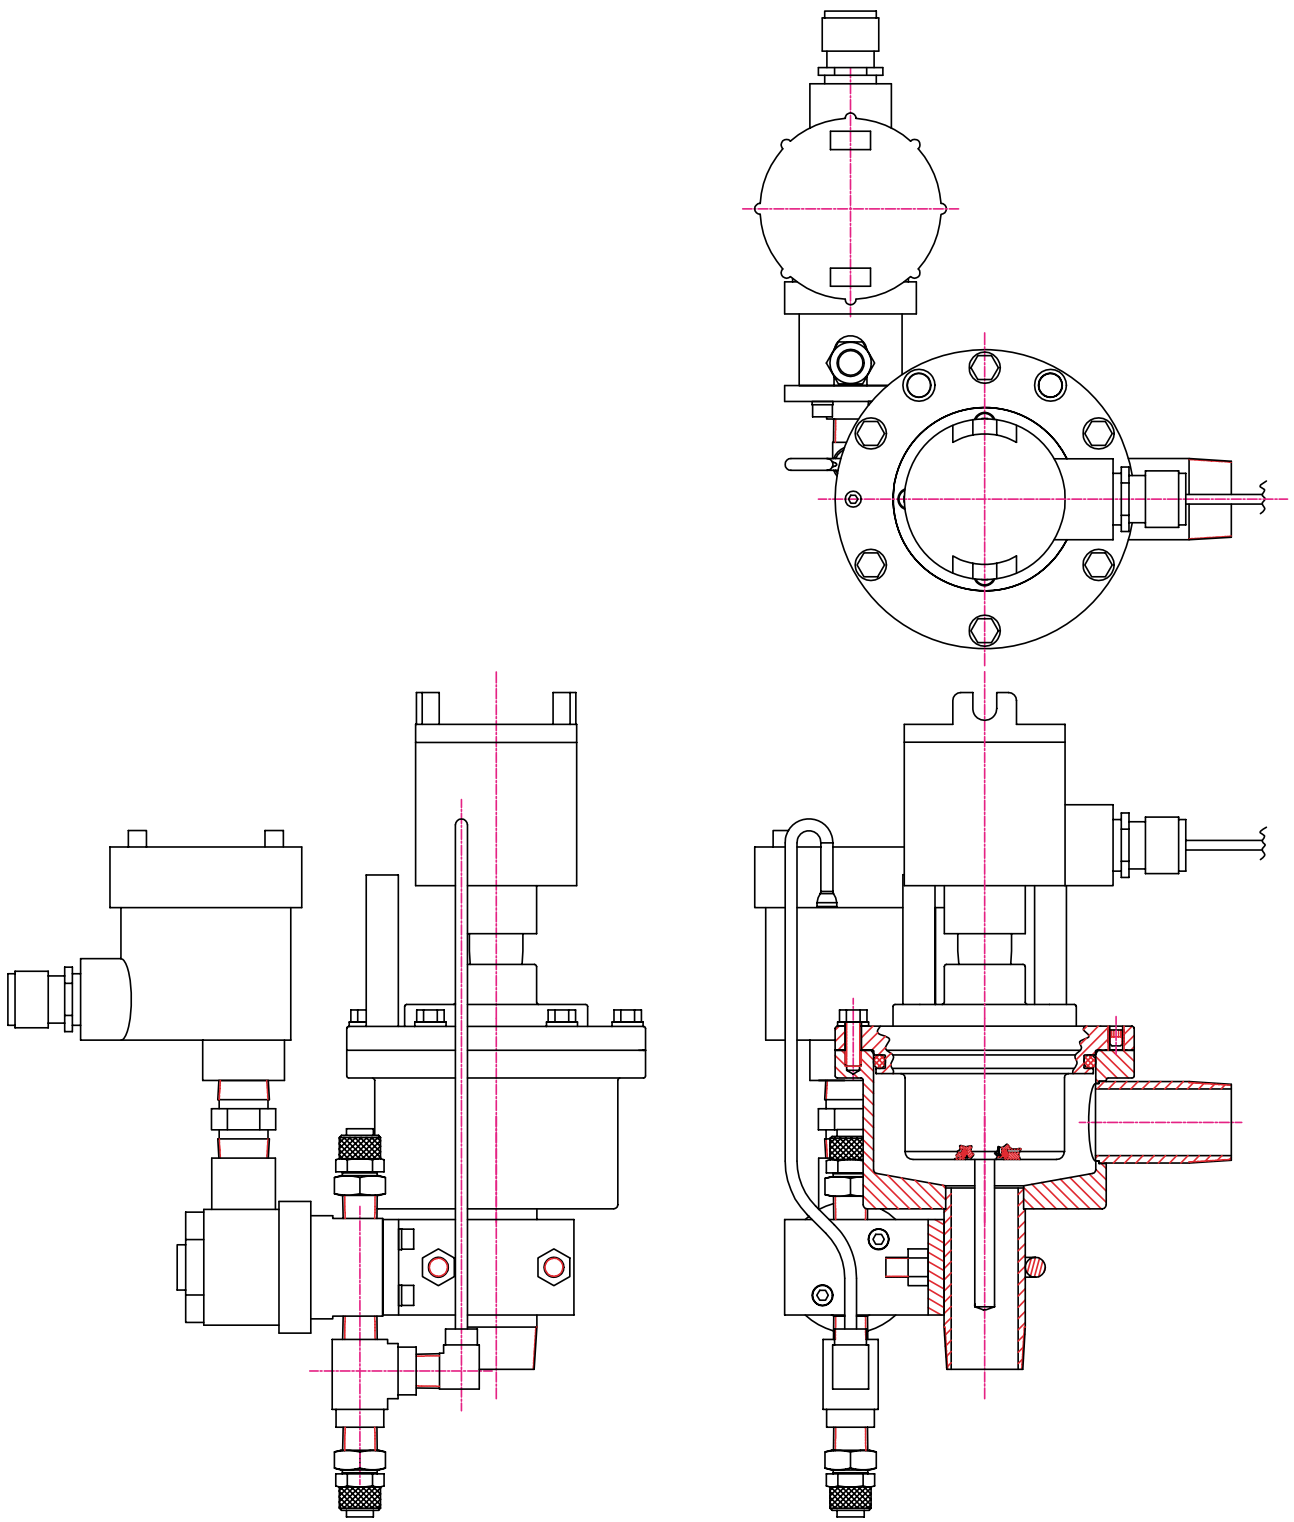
Stand-Alone Optional Solenoid Valve Mounted to Stand-Alone Viscosity Sensor
